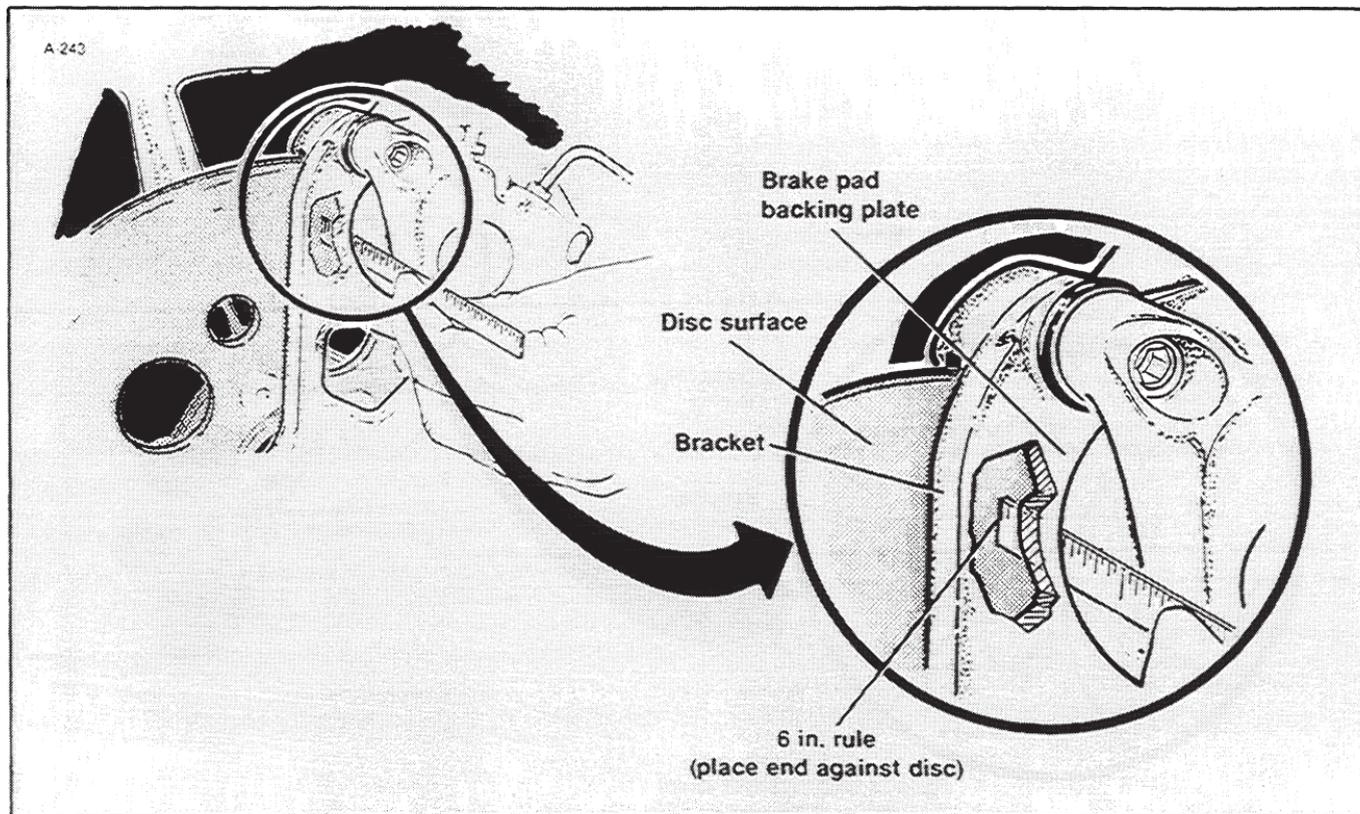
Measuring Rear Brake Outer Pad (Typical)
